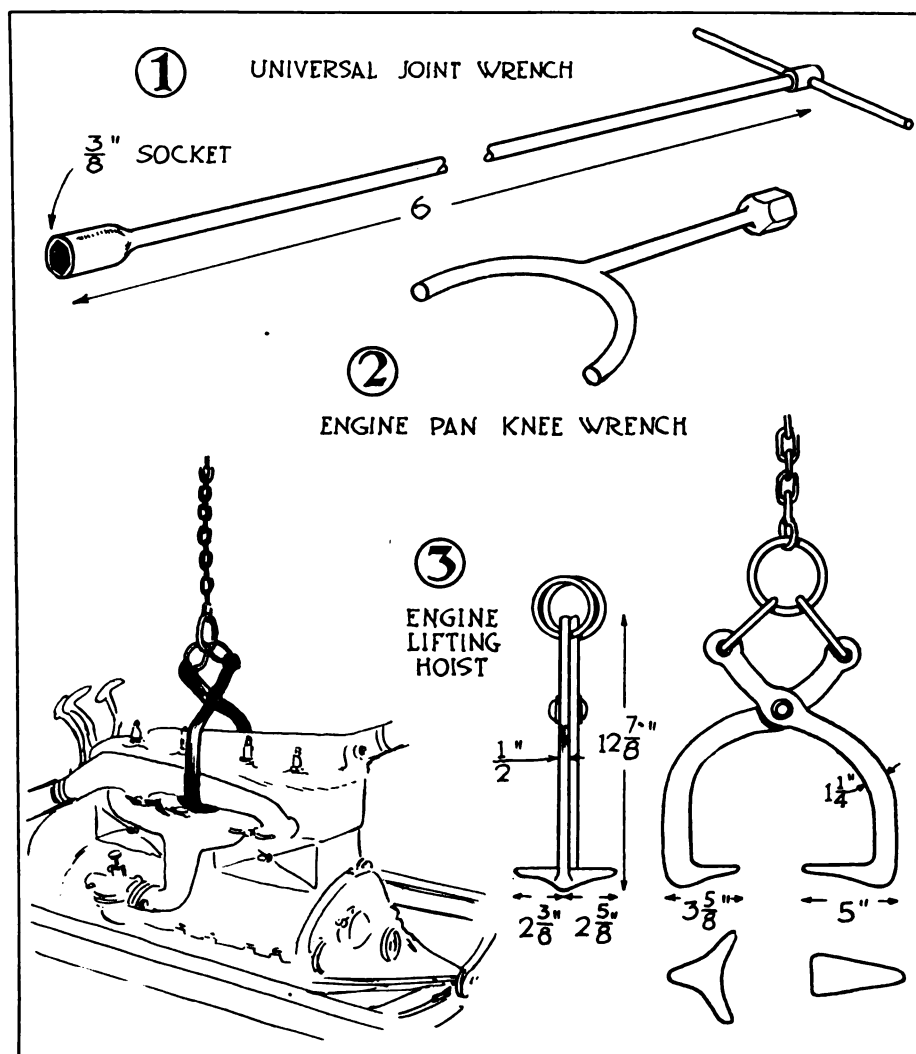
Universal Joint Wrench—This wrench permits the bolts holding the Universal joint to be removed from the rear of the car much quicker than they could be removed by a short socket wrench through the floor bolts. It is a $\frac{3}{8}$ -in. socket wrench with a 6-ft. handle.
